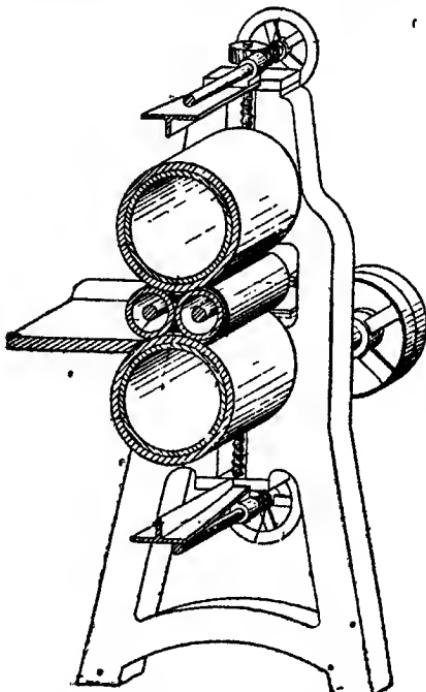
“FOUR-CONTACT” GLOSSING MACHINE.
